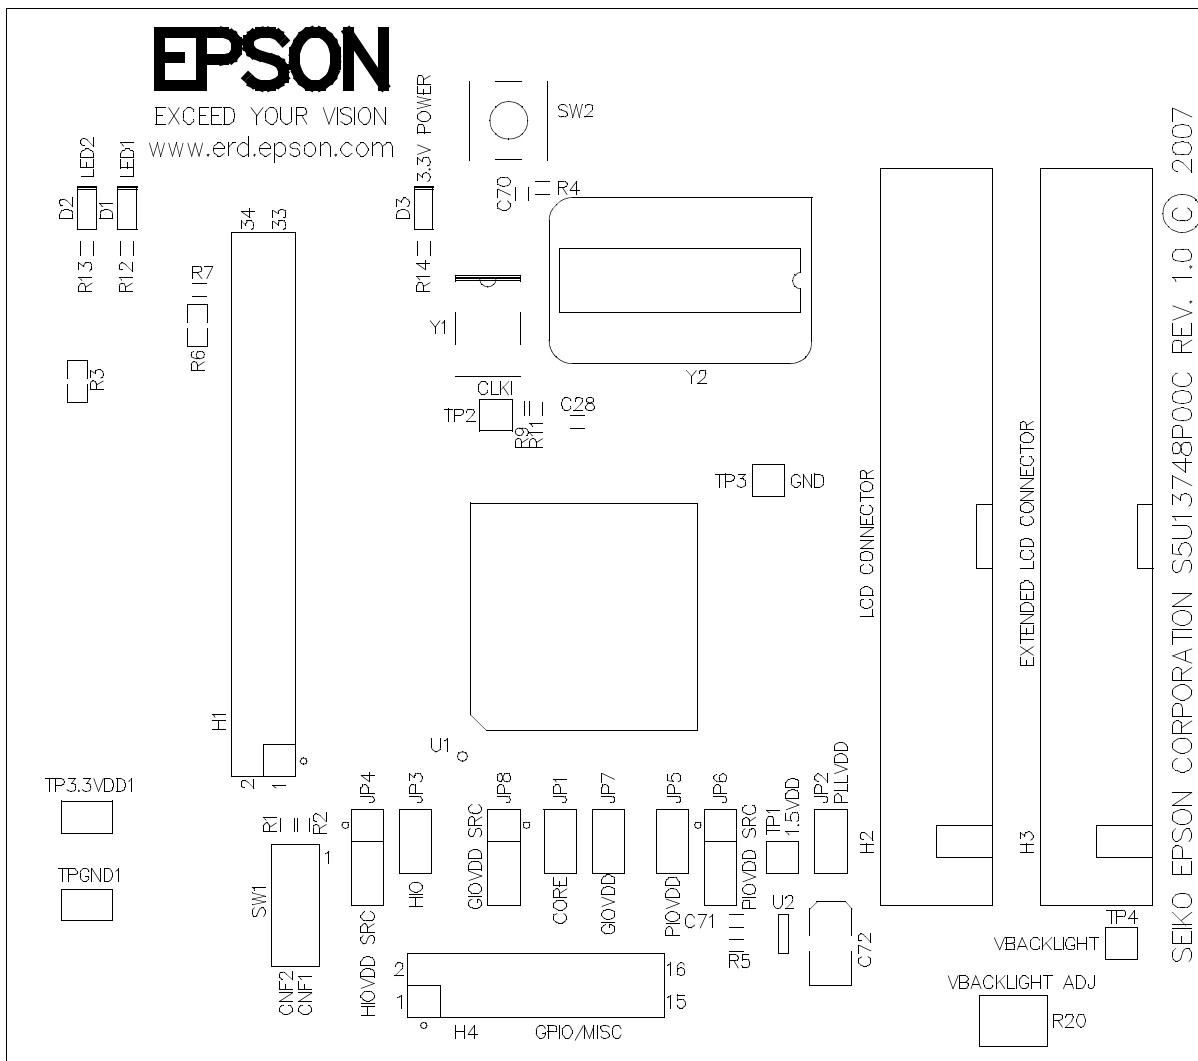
S5U13748P00C100 Board Layout - Top View
